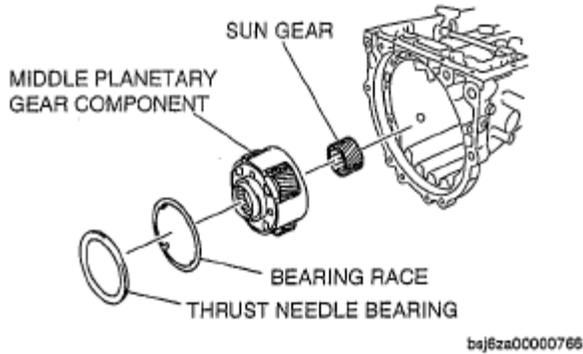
Identifying Middle Planetary Gear Component And Sun Gear
